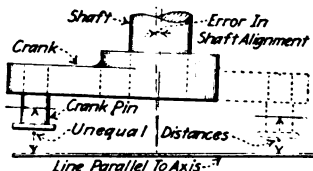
Showing how incorrect shaft alignment may be detected at dead centers by measuring from a line which is parallel to the cylinder center line.
